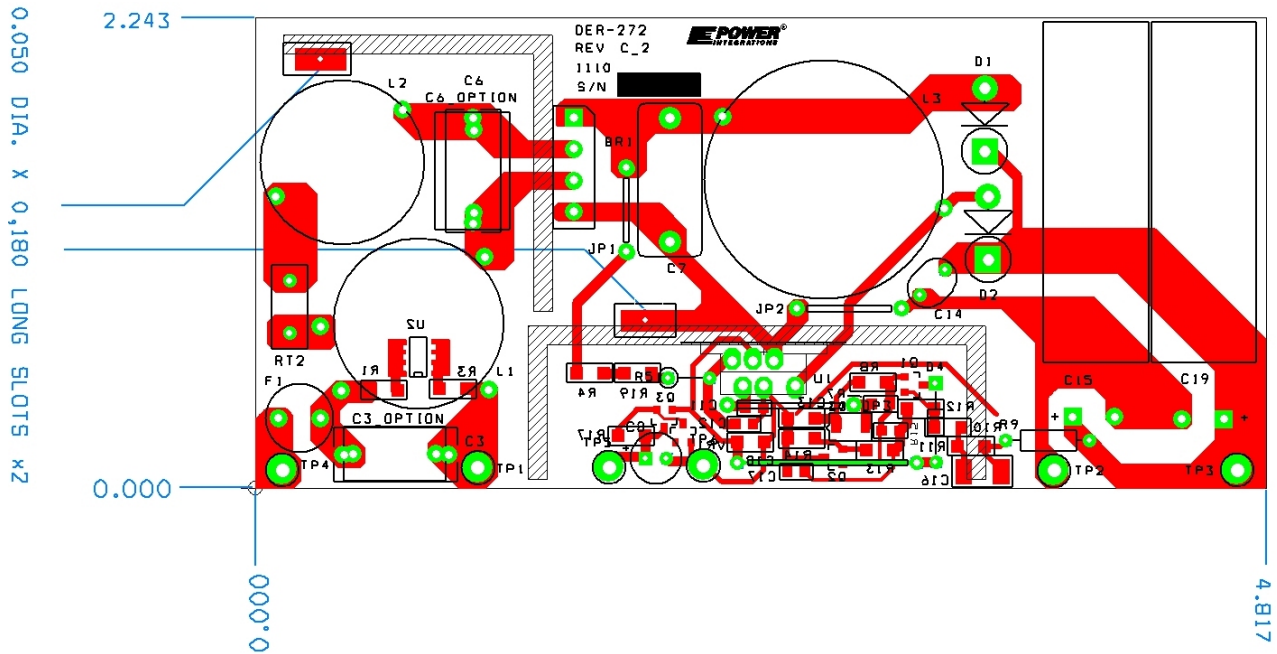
Printed Circuit Layout, 4.81" (122.2 mm) x 2.24" (56.9 mm).
